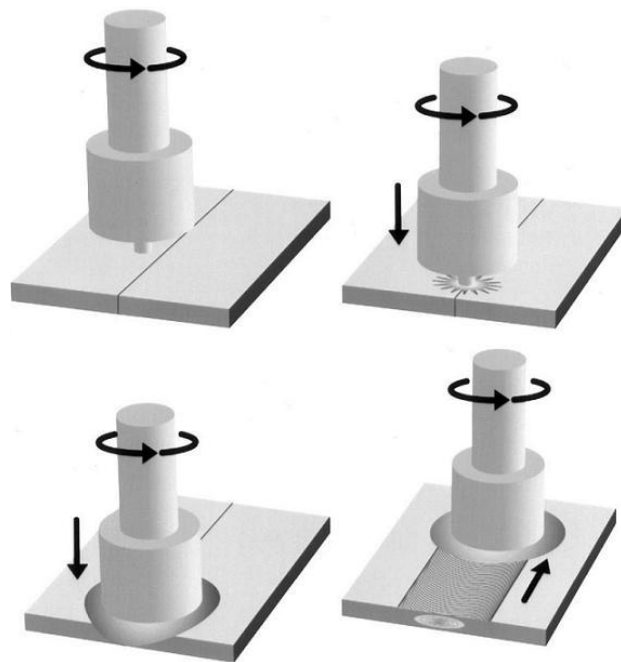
Schematic illustration of the friction stir welding process [41].
